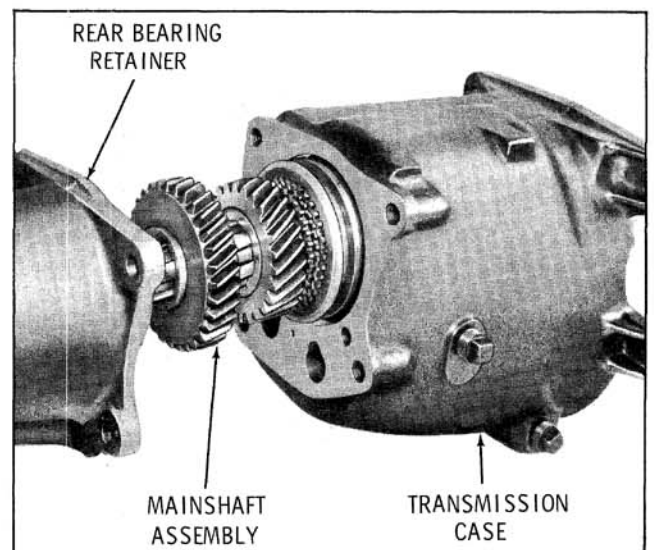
Removing Rear Bearing Retainer and Mainshaft
